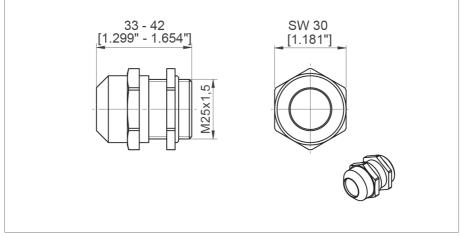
Offshore cable screw connection; material: stainless steel (V4A); clamping range 9...17 mm
